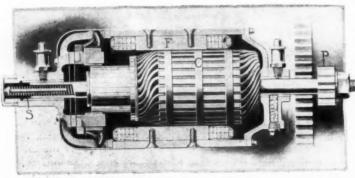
Section showing displacement of armature when pinion is out of mesh with flywheel .
